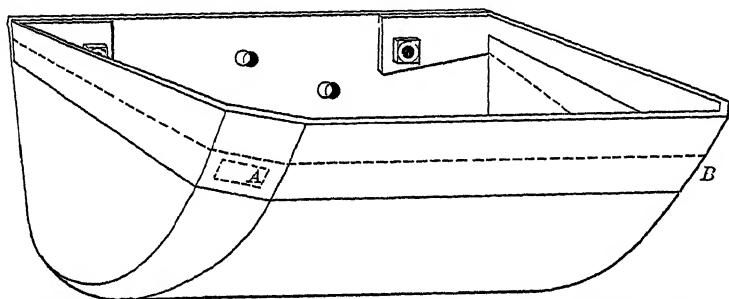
ISOMETRIC PROJECTION OF BUCKET WITH LIP ATTACHMENT, SHOWING THE LIP BOLTED TO BUCKET.
